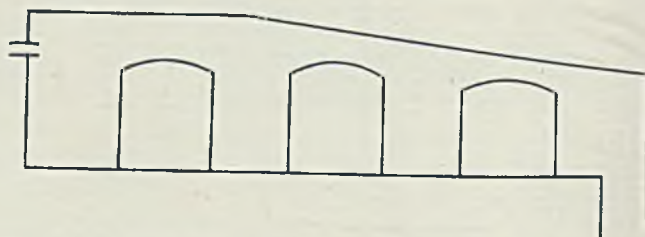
Schematic vertical section through a batch-type billet-heating furnace. The burner is indicated at the left end of the drawing
